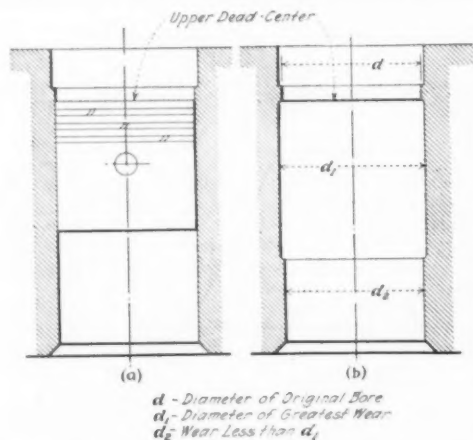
CYLINDER DESIGN IN WHICH AN OVERSIZE PISTON CANNOT BE INSERTED WITHOUT REBORING
